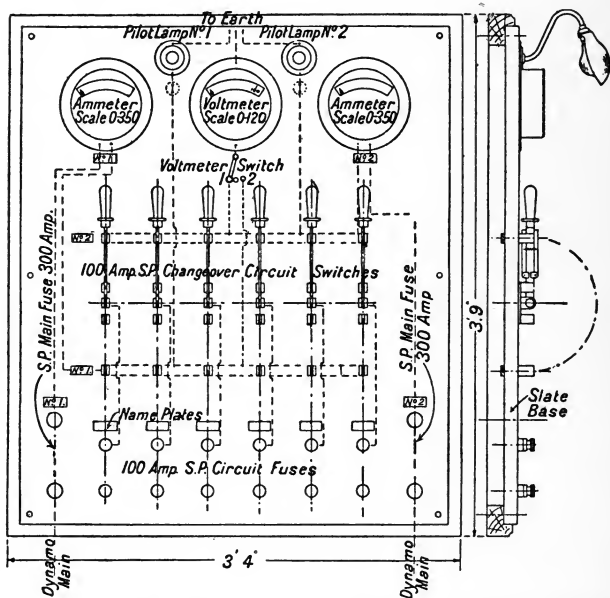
ARRANGEMENT OF SWITCHBOARD FOR SINGLE WIRE INSTALLATION.
